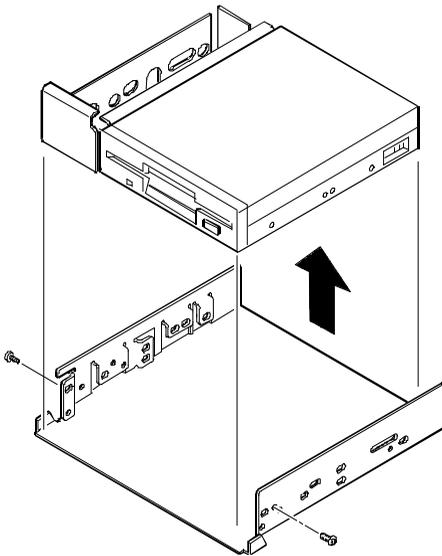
15 Removing Metal Face Plate from Top Device Tray
